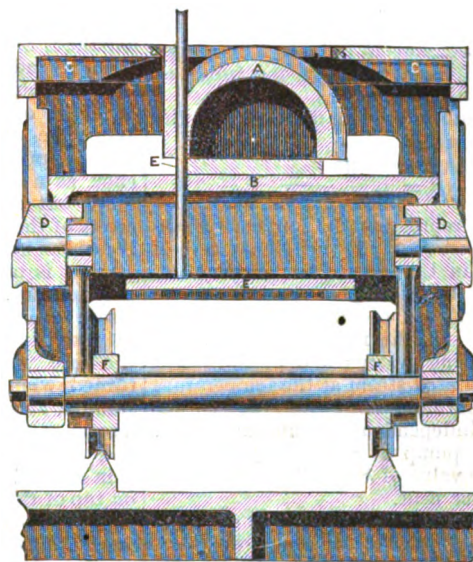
Section Showing Pattern Drawn through Stripping Plate.
